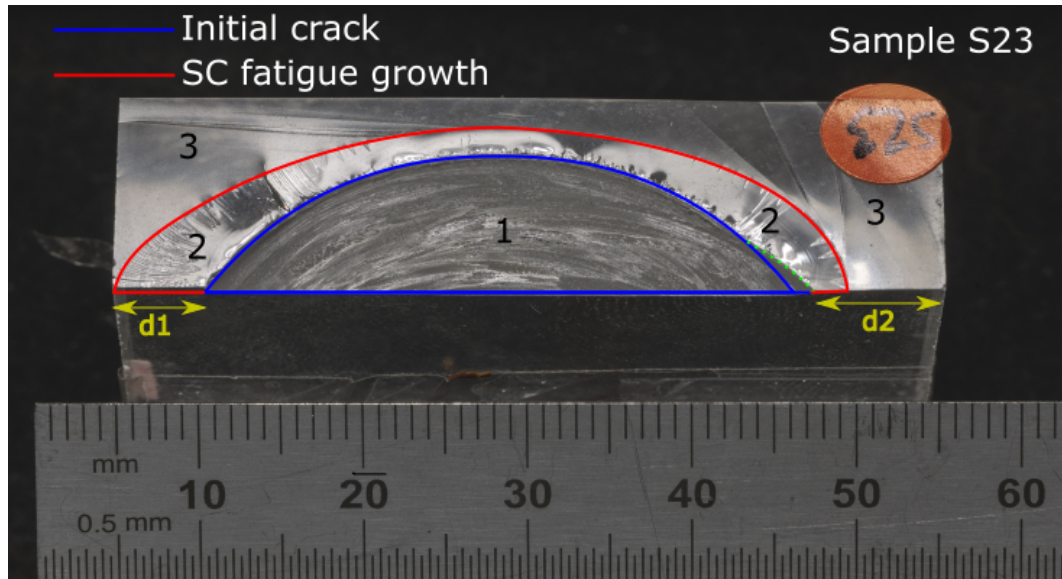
Test on Perspex plate - Fracture surface - Sample S23
